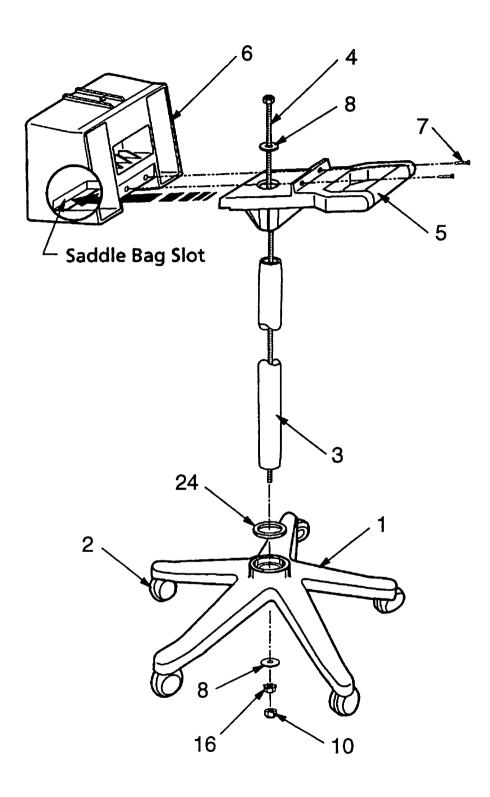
A. Model 1042 Instrument Stand Final Assembly
